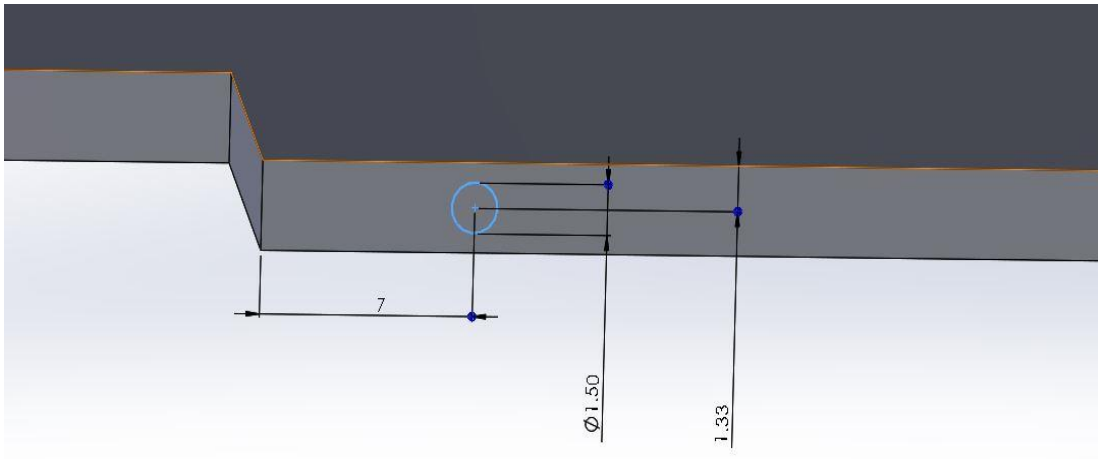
Bottom Inlet, Slanted Cavity (all units in mm)
